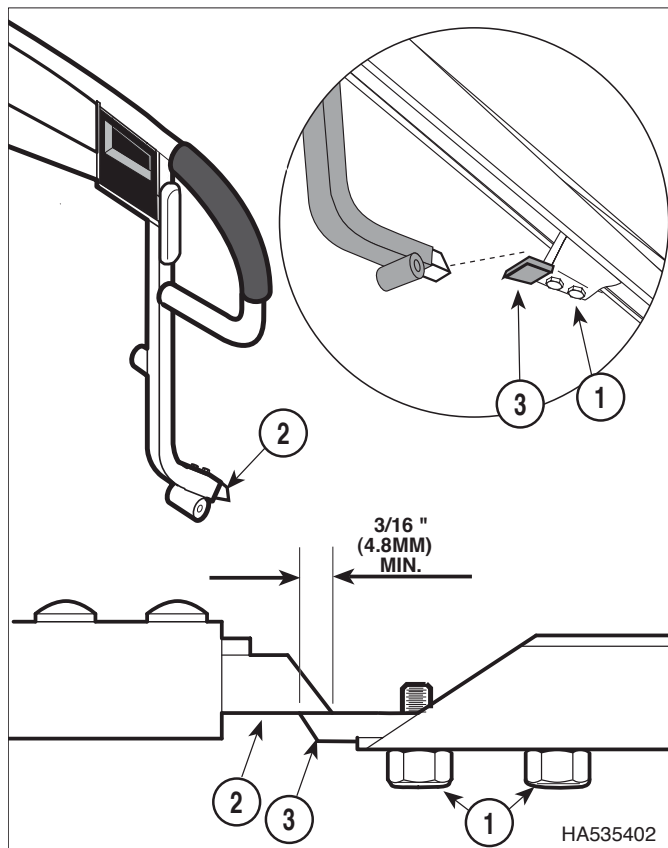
750N and 750W Siderail Latch Adjustment
